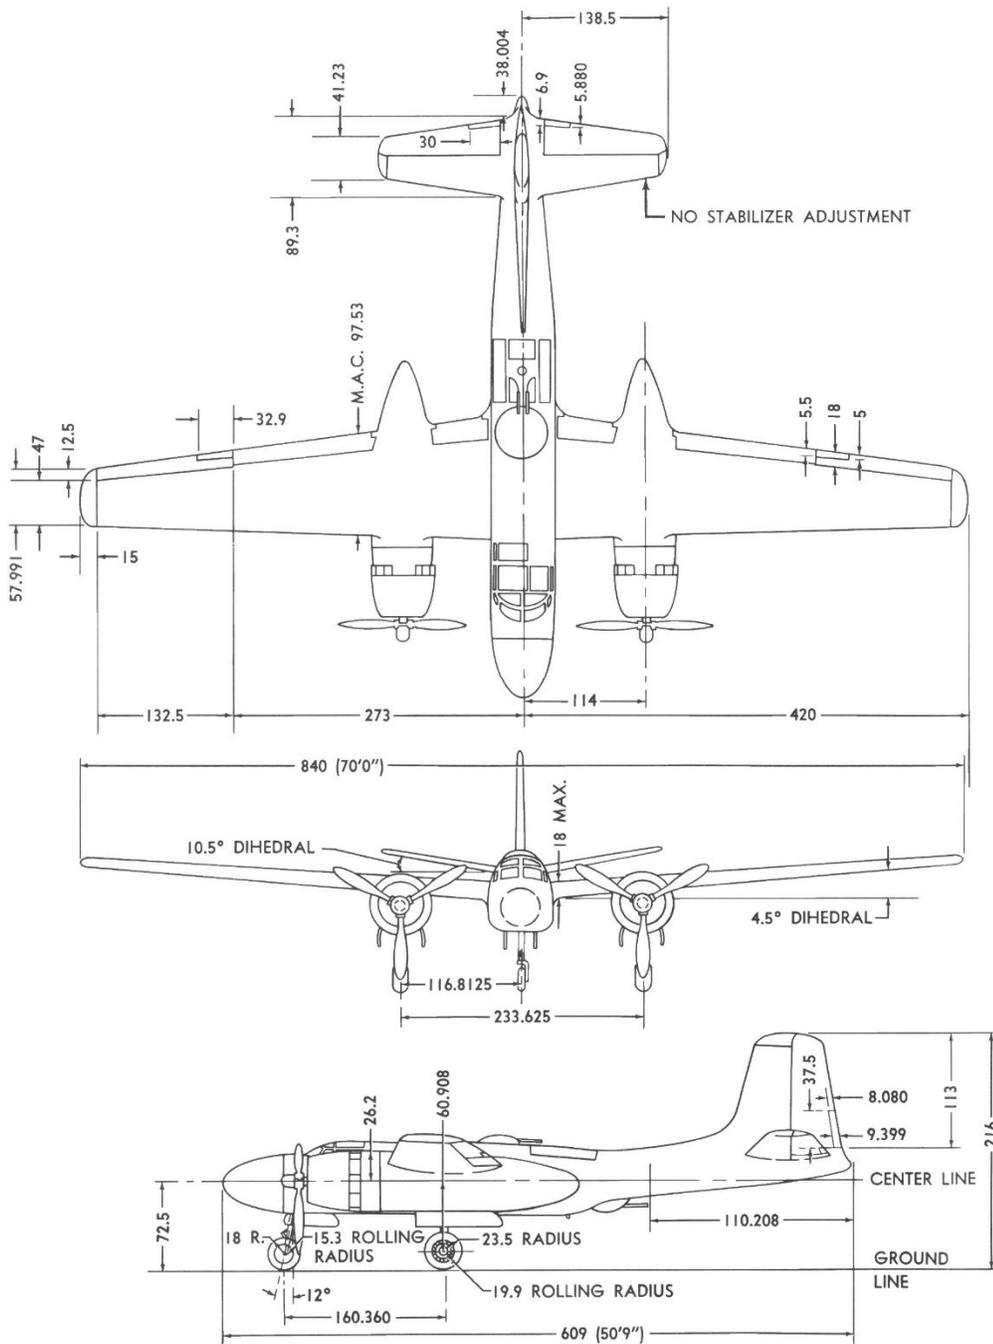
Full-Scale Douglas A-26 Invader 3-View Drawing
